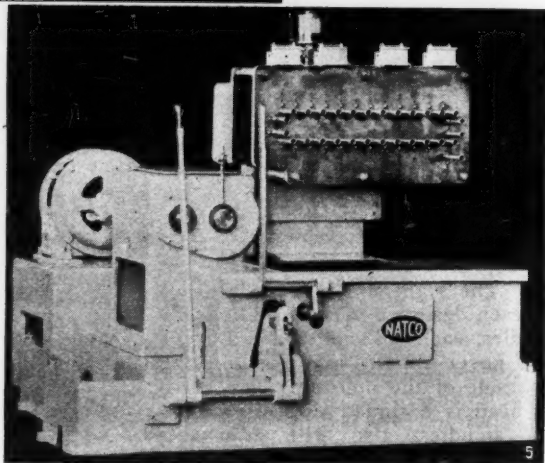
This machine forms part of the conveyor line. It drills 29 holes in a cylinder block in less than a minute. Fig. 5—The 29 holes are tapped on this machine, each tap being fed by an individual lead screw. Production—60 per hr.
